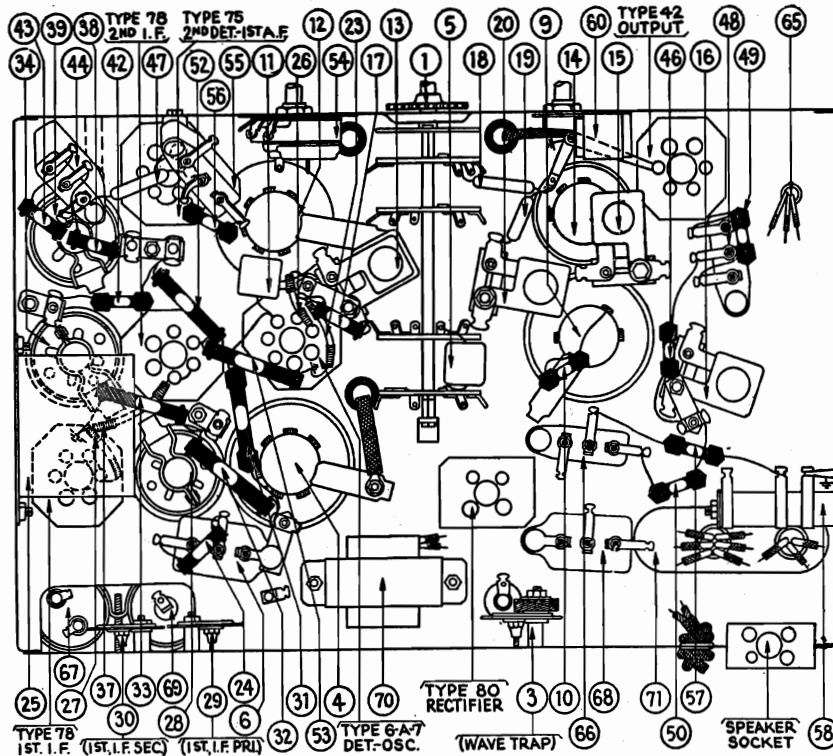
Bottom View of Chassis, Showing Parts, and Position of Compensating Condensers Located,—and Reached,—from Below Chassis.
